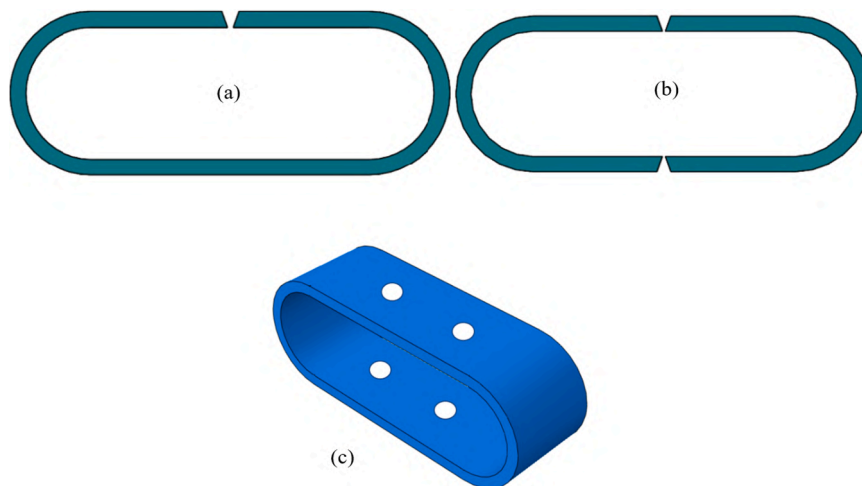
Welding Locations of the Elliptical Damper: (a) First Method (b) Second Method (c) Locations of the Holes.
